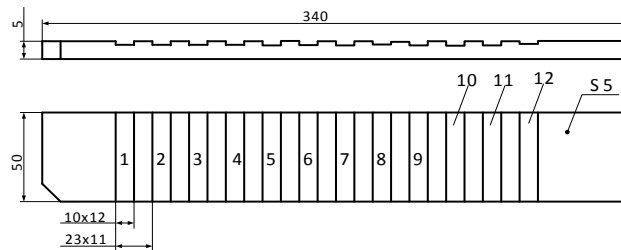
Sketch of the workpiece with marked milling grooves
